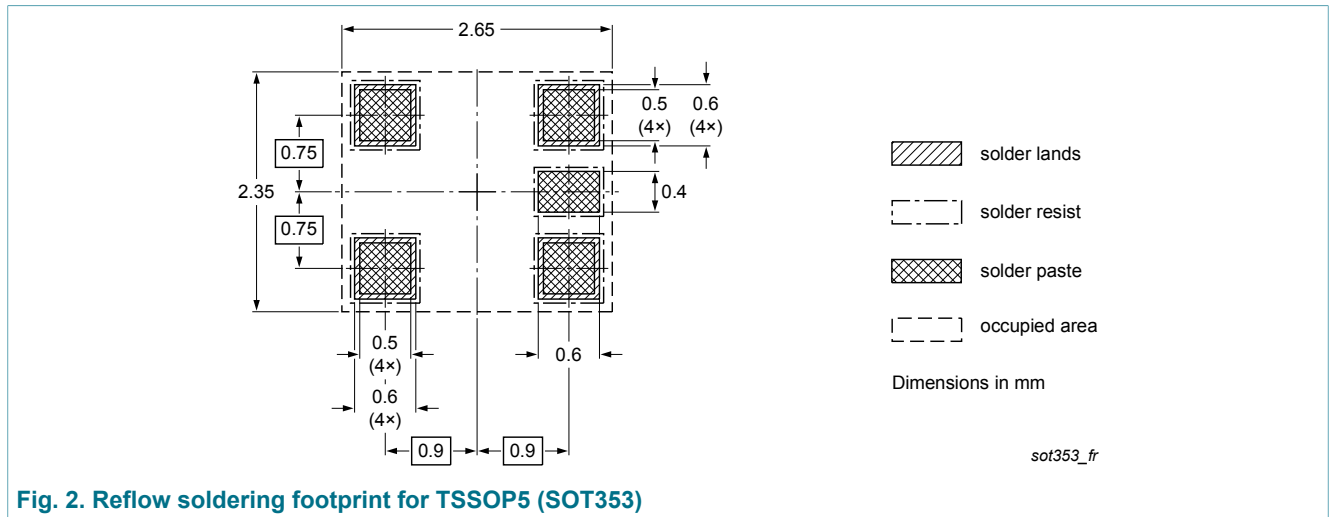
Reflow soldering footprint for TSSOP5 (SOT353)
